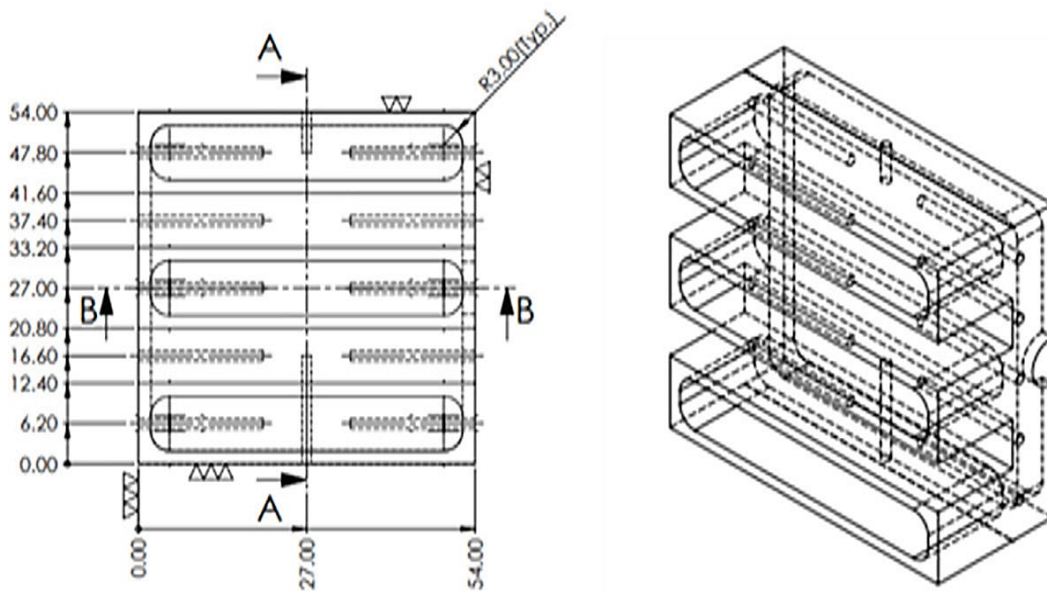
Heat sink dimensions: (a) front view and (b) side view [4]
